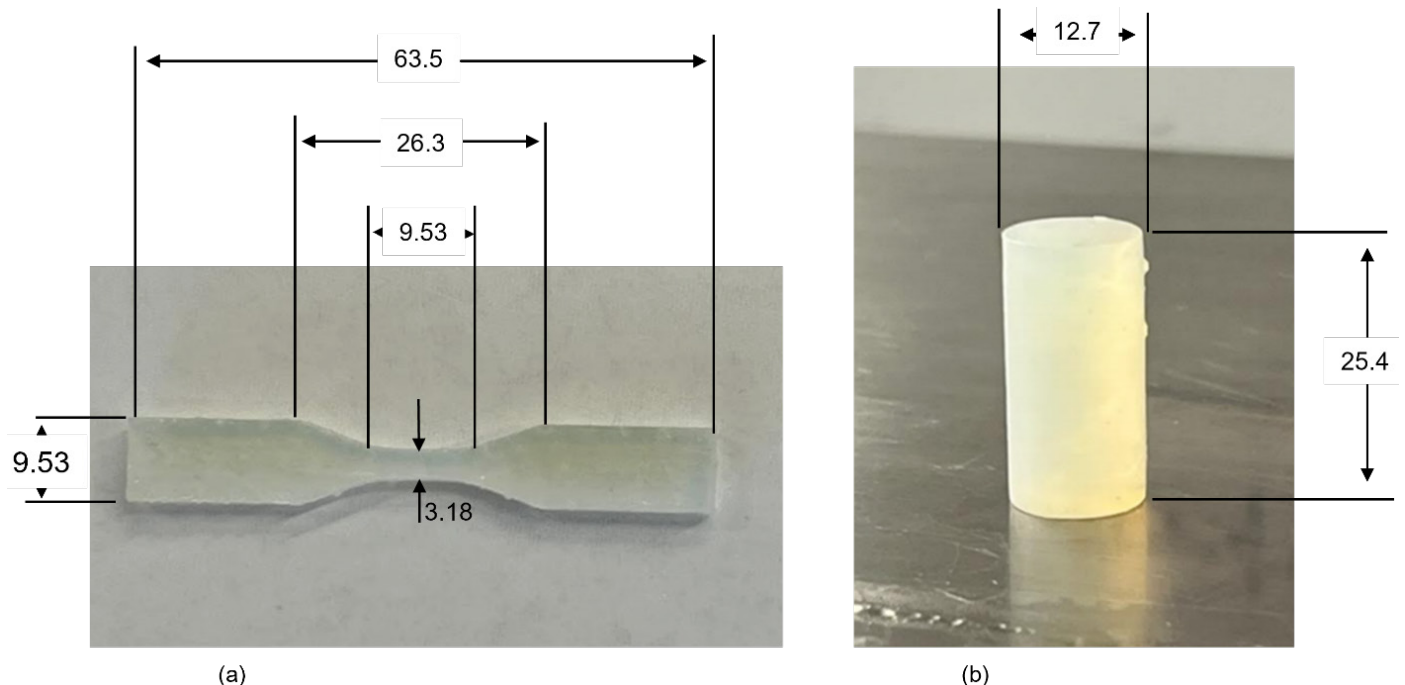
Examples of test specimens used for (a) WPC1 ASTM D638 and (b) WPC1 ASTM D695. Measurements in mm.
